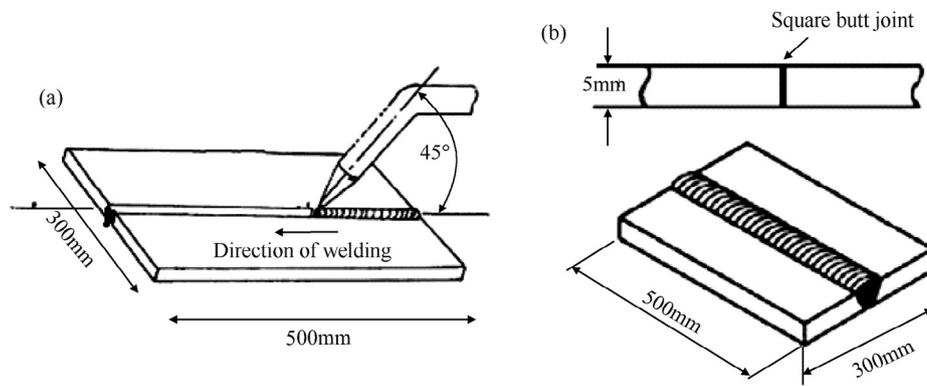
Weld joint design for (a) SMAW and (b) GTAW processes.
